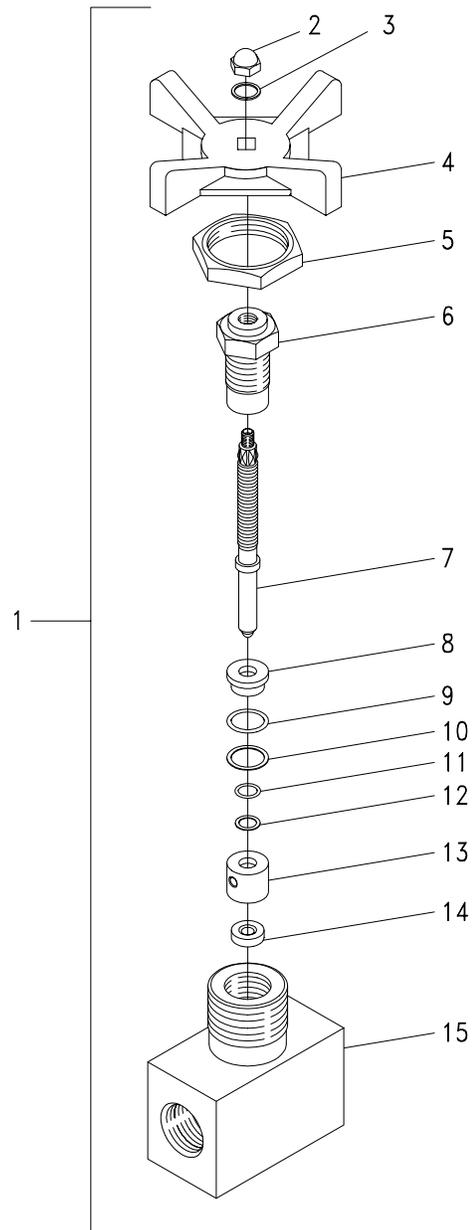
CPV HP Isolation Valves (AHP-V501 thru AHP-V504 and AHP-V601)
